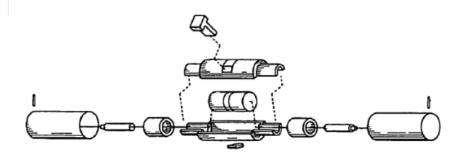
is an exploded view of the initial prototype of the mobile robot.
